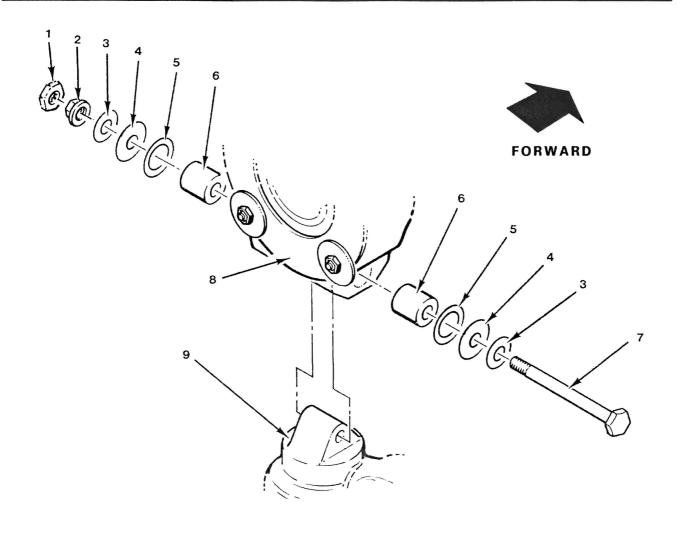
ACTUATOR ASSEMBLY INSTALLATION
